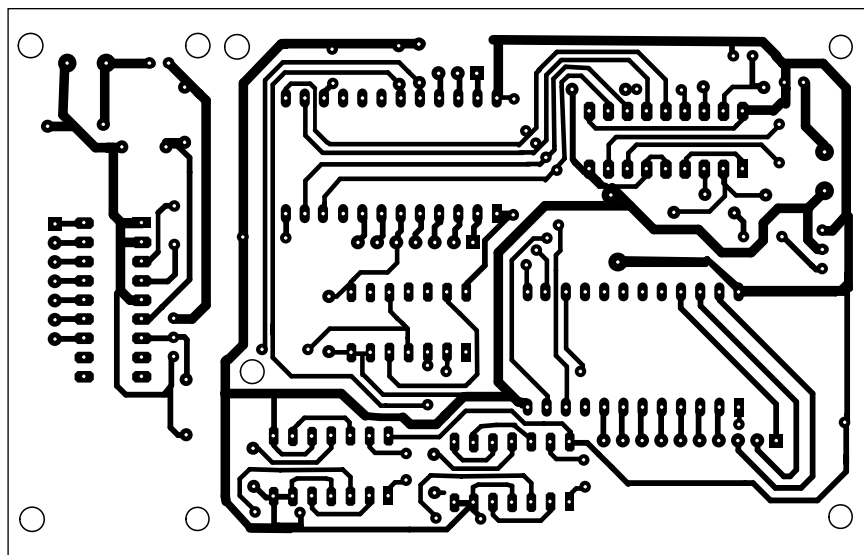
Actual-size PCB layout for circuits in Figs 1 and 3
